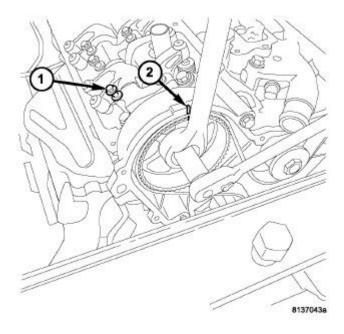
Right Cam Gear Retainer Bolt & Timing Mark Courtesy of CHRYSLER LLC
